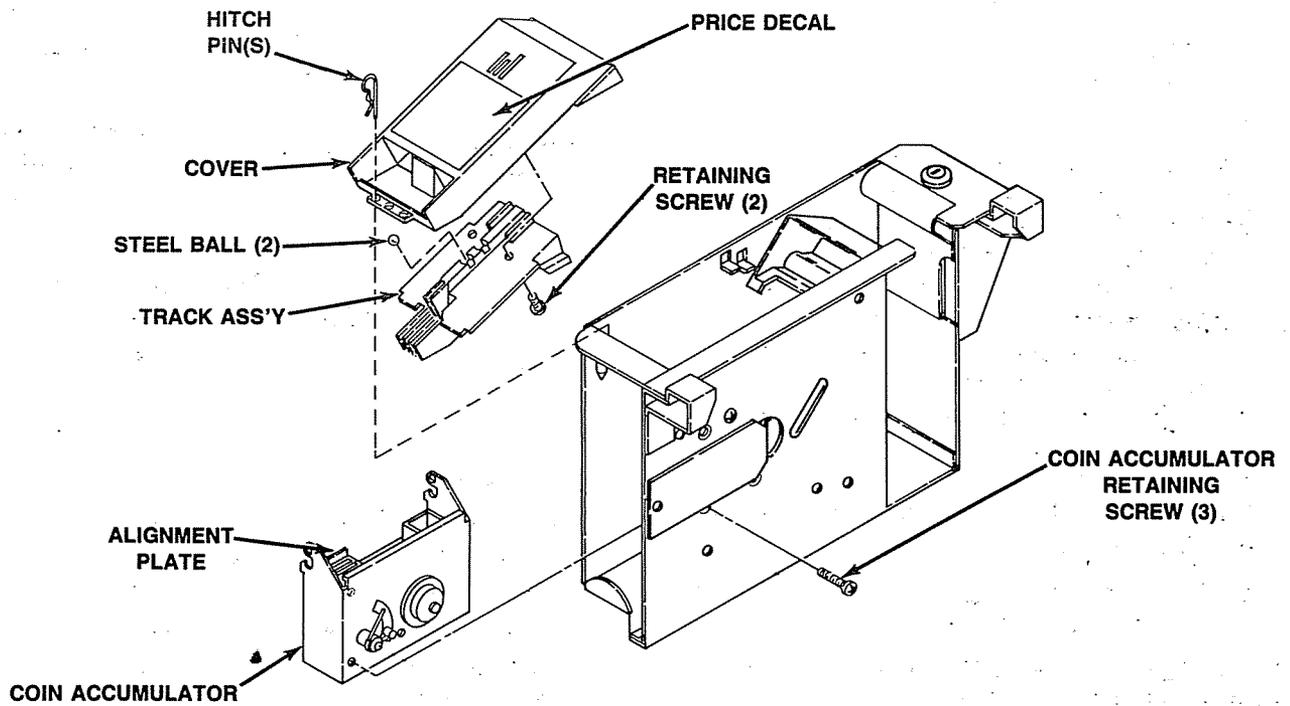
MECHANICAL COIN MECHANISM PARTS IDENTIFICATION
